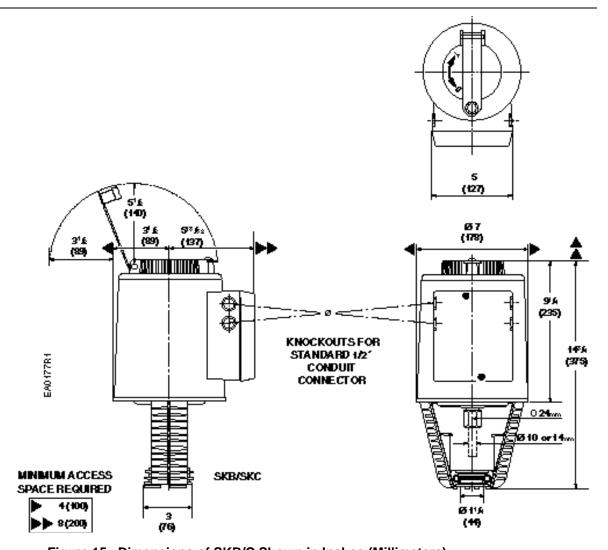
Dimensions of SKB/C Shown in Inches (Millimeters).
